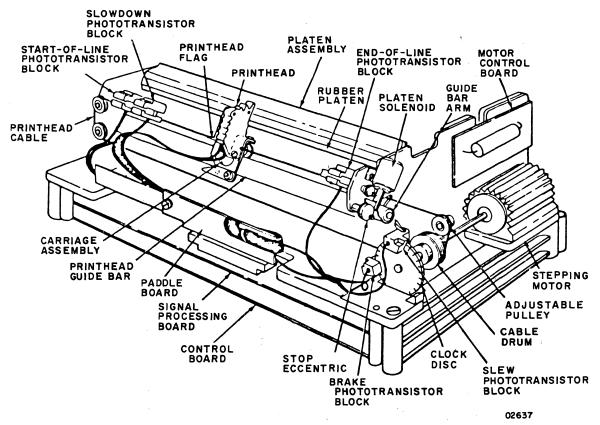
Nonimpact Printer Print-Mechanism Assembly
